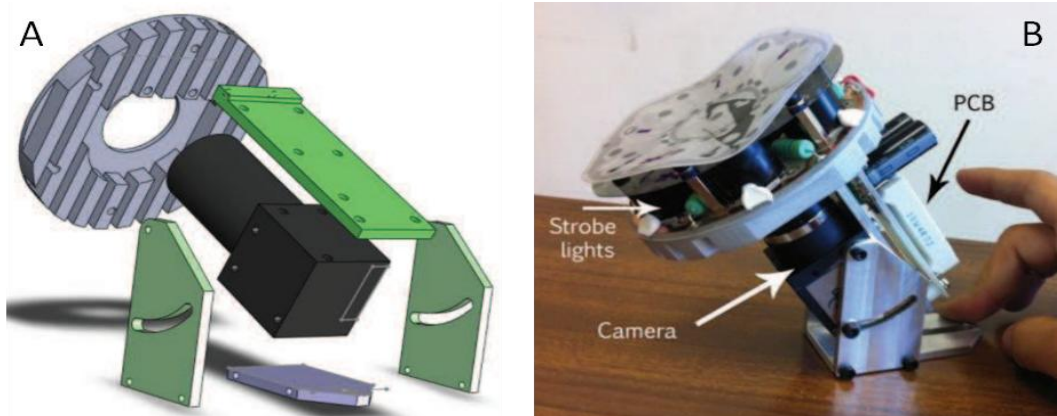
(A) Exploded view of the camera mount and heat sink (B) assembled camera with strobe light and PCB ready to be mounted on the main frame Programming IDS UI 2250 SE-C
